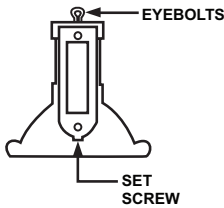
Tilting accessories are not required. Simply adjust set screw at one end to achieve desired degree horizontal tilting. Eyebolts with holes for chain-mounting are provided.
